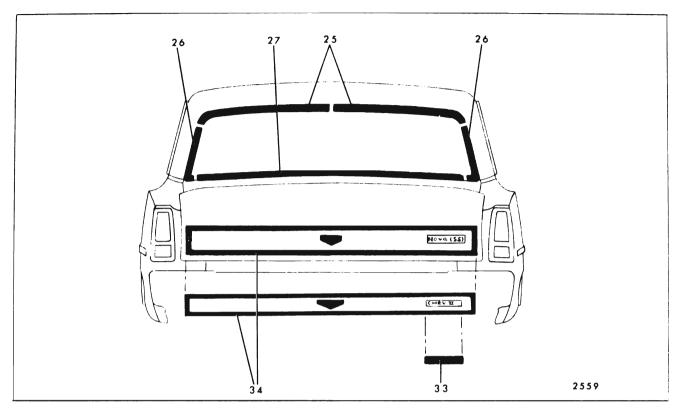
Chevrolet 11400-11600-11800 Styles (Except 35 Styles)
